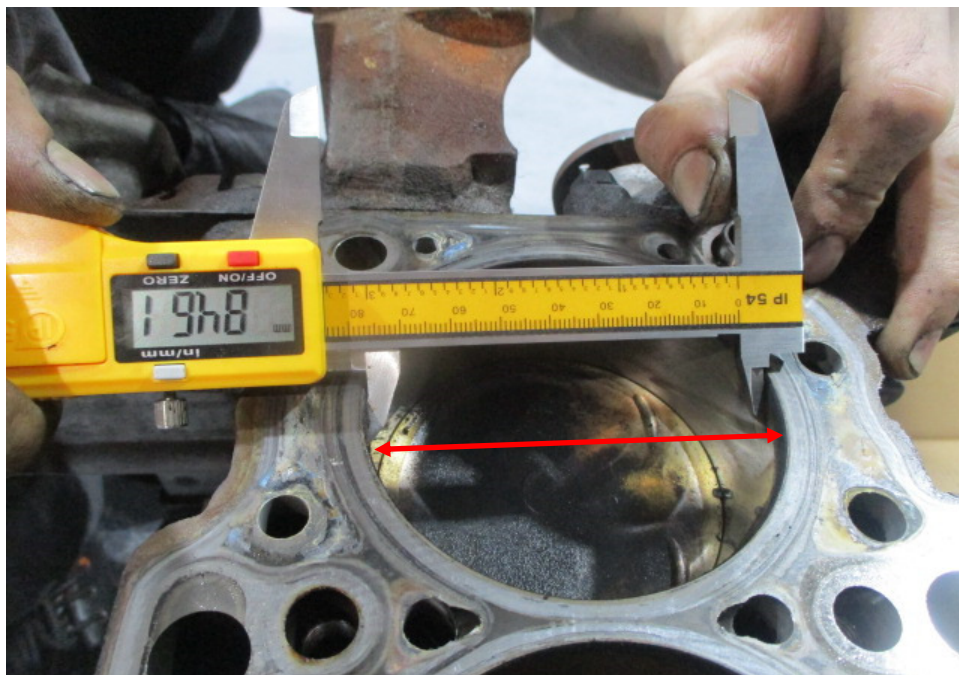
shows measurement being carried out to the bore (arrowed) of cylinder 1 of the Mitsubishi engine. The bore measurement of cylinder 1 was recorded to be 84.61 mm.
